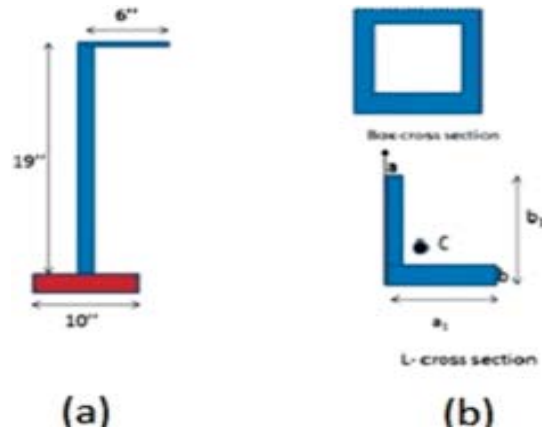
(a) Dimensions of mounting (b) Cross-sectional details
